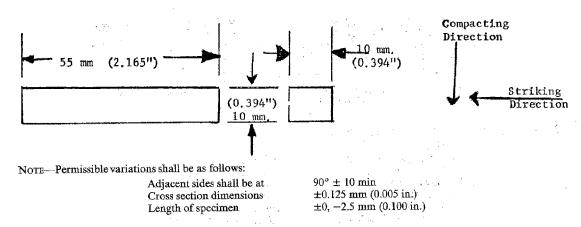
Charpy (Simple Beam) Impact Test Specimens for Metal Powder Structural Parts
